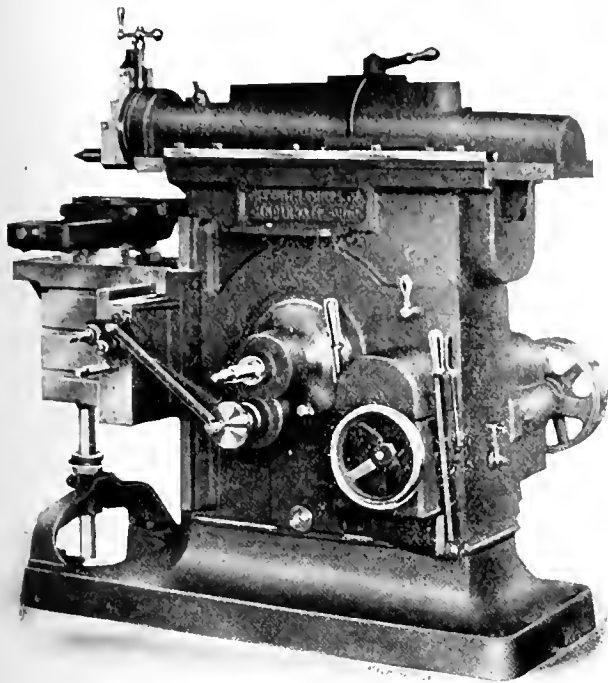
Smith and Mills Variable All-gear Drive Back-gear Crank Shaper
